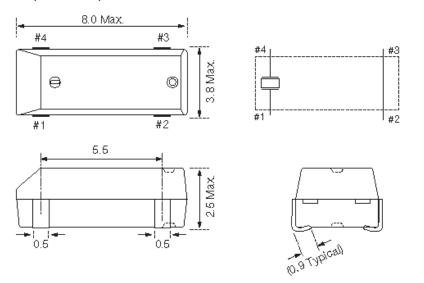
Top, Side and End Views Pad 2 & 3 No Connects
